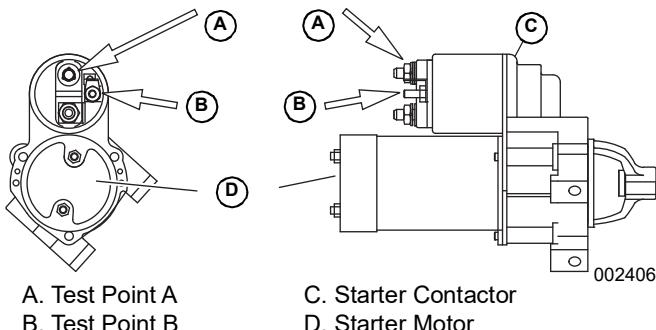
Starter Contactor (V-Twins and units with 426cc Engine)
